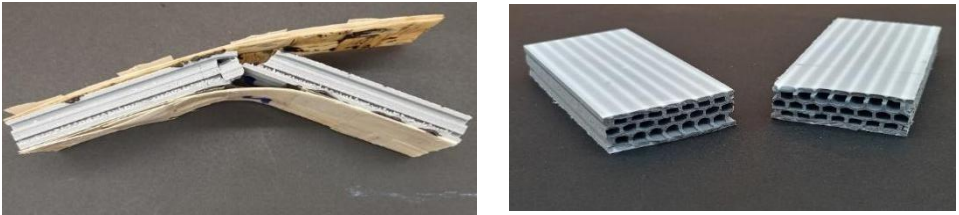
The 3 Point-Bending specimens after the test A) Composite sandwich. B) Raw core.
